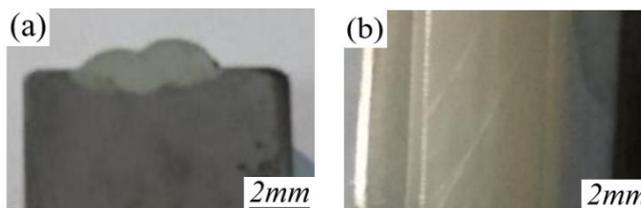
Cladding coating style: (a) longitudinal section; (b) cross section after grinding
